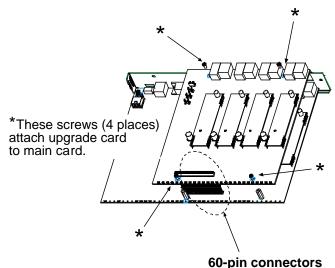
Attaching upgrade card to main circuit card (secure 4 Phillips screws; mate 60-pin connectors)
